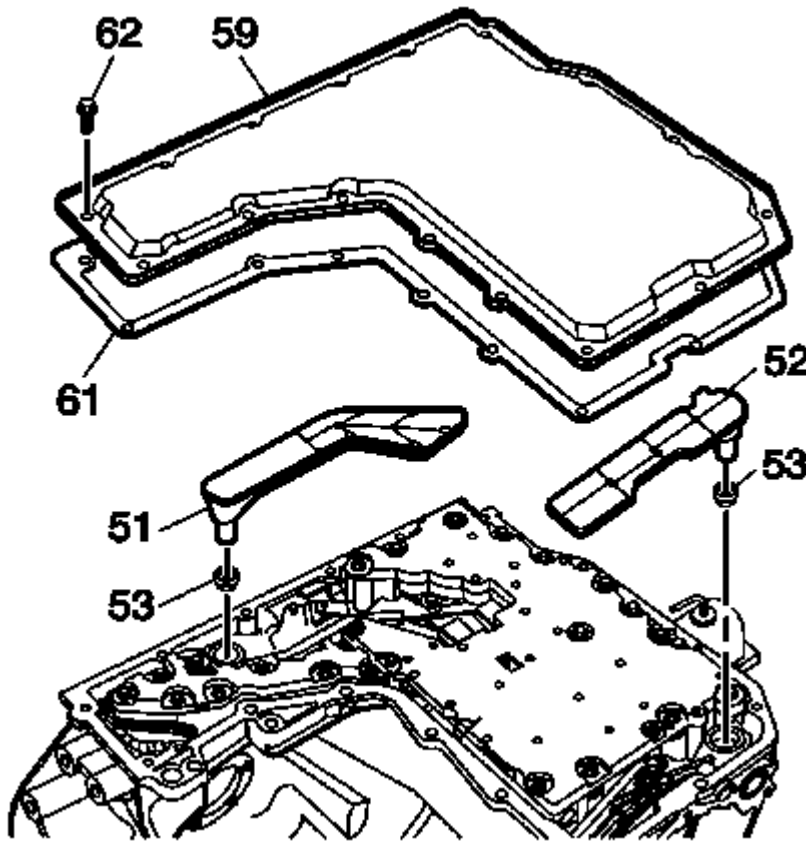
View Of Bottom Pan, Scavenge Screens & Gasket
